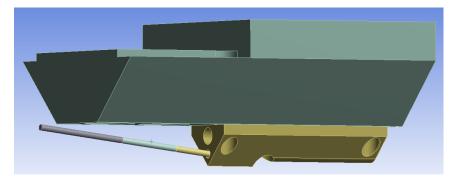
Geometry with the Wire Guide hidden to show the divided welding wire
